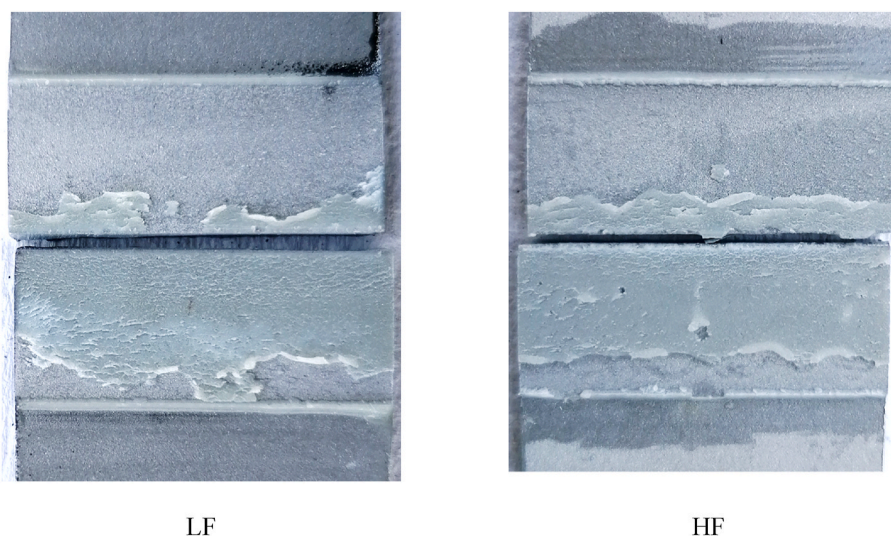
Example of fracture surfaces for AL joints, load ratio R = 0.1.
